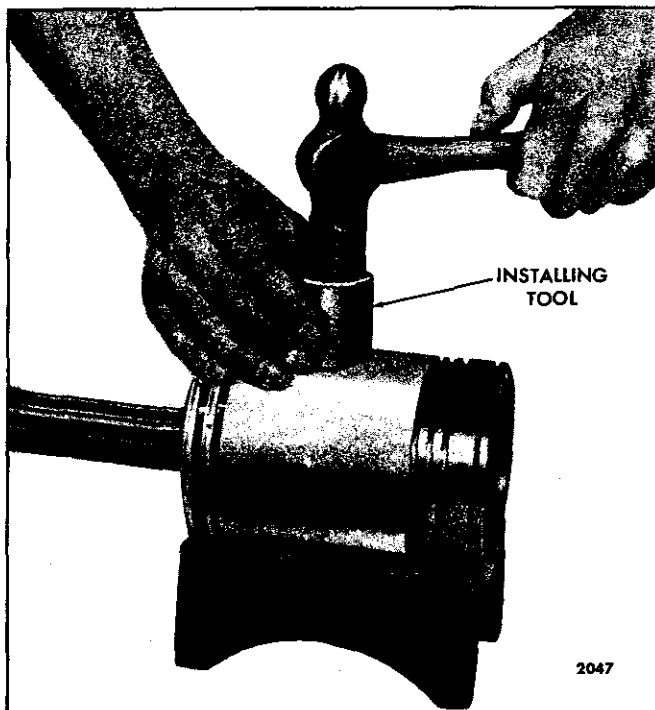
Installing Piston Pin Retainer Using Holder J 1513-02
